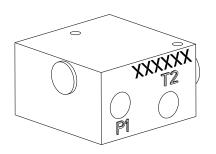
Flow Regulator Valve - Part Number Location XXXXXX
